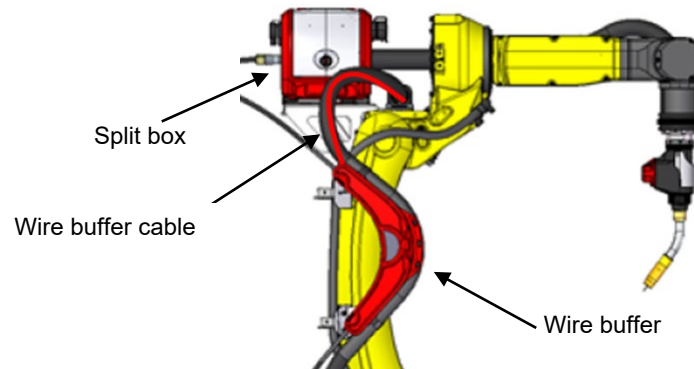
(a) Replacing the wire buffer cable (1)
